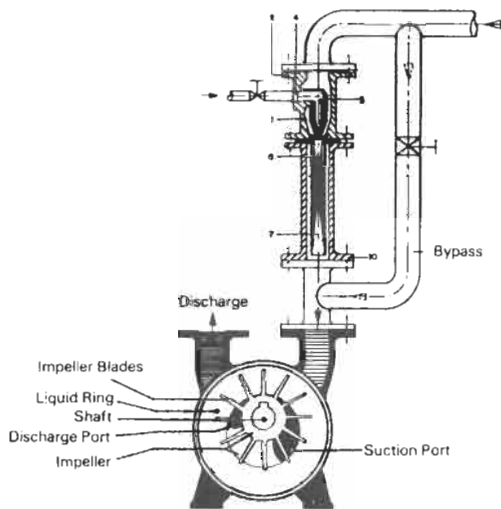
C. Improving the maximum vacuum obtainable by staging an ejector ahead of the suction of a liquid ring pump or any other device that can handle water into the unit, unless dry air is used. By permission, Graham Manufacturing Co., Inc.
